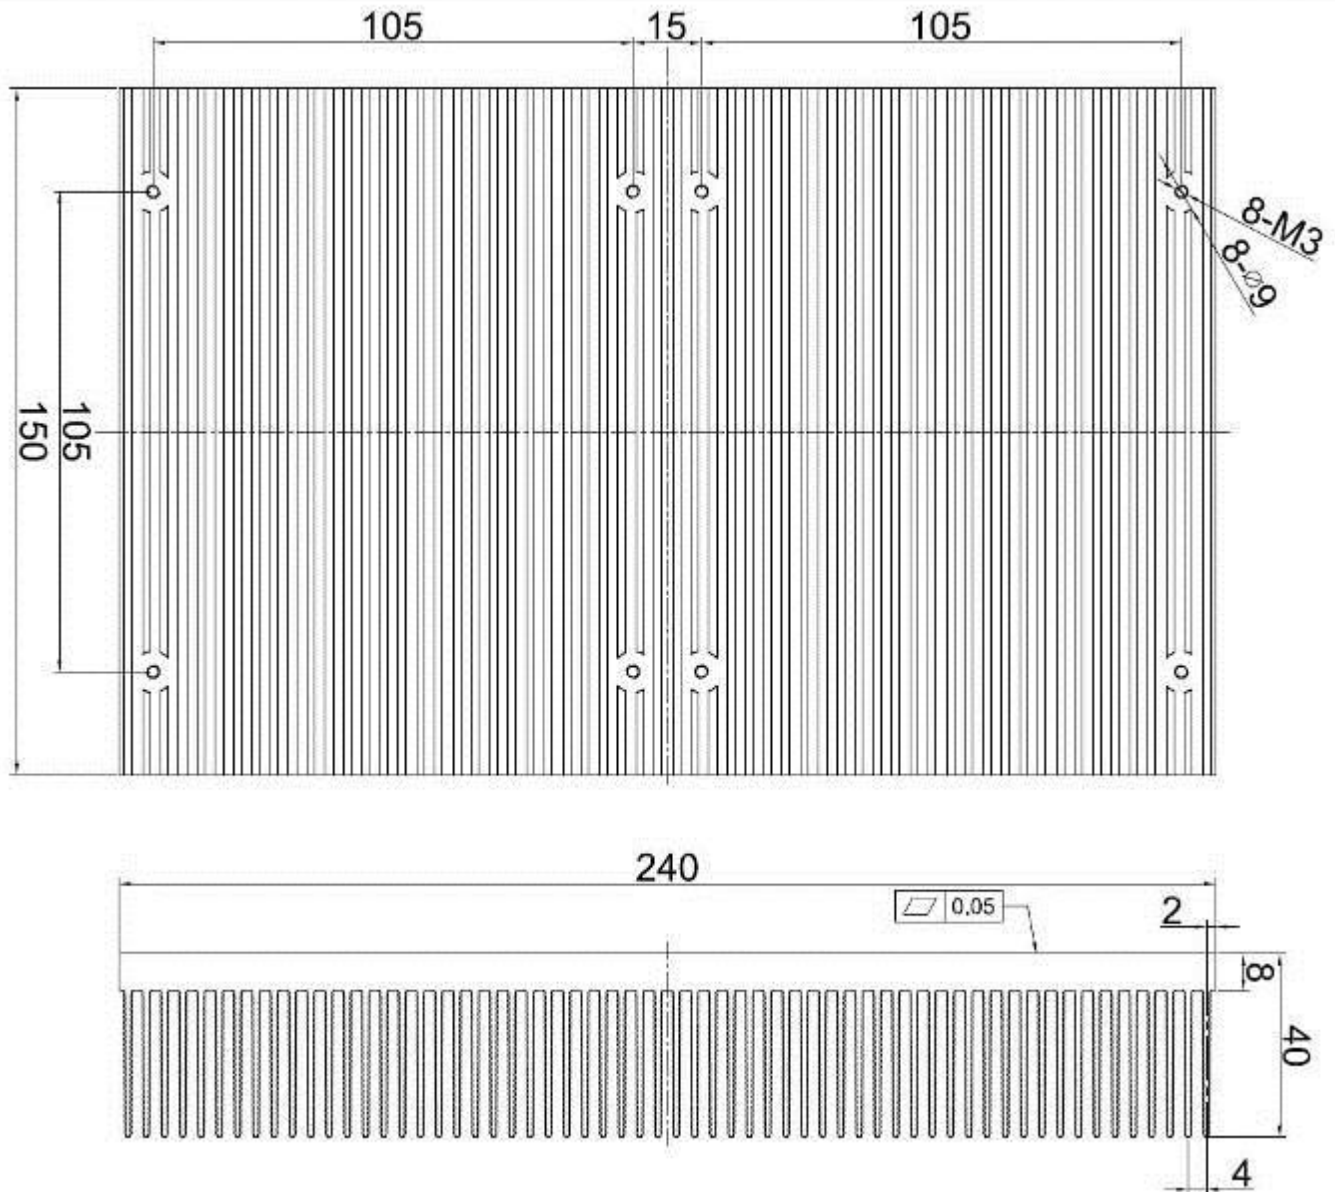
Mechanical Dimensions of Heat Sink ATHS-4/240/150/40H8
